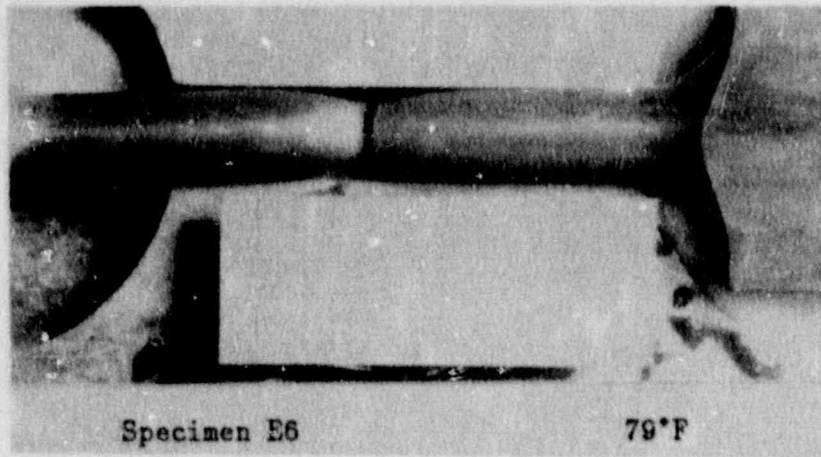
FRACTURED TENSILE SPECIMENS FOR ZION UNIT 2 REACTOR VESSEL SHELL
